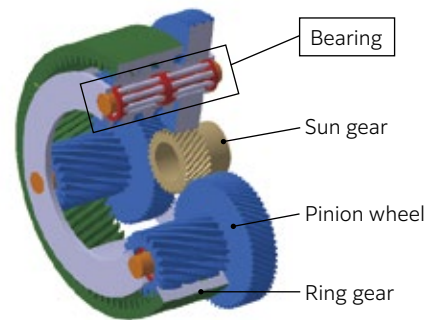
Structure of co-axial type e-Axle planetary gear reducer
